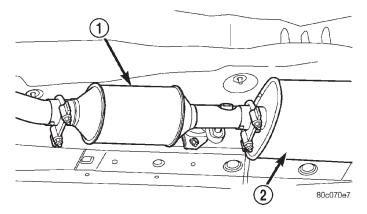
Exhaust Pipe-to-Muffler Clamp
